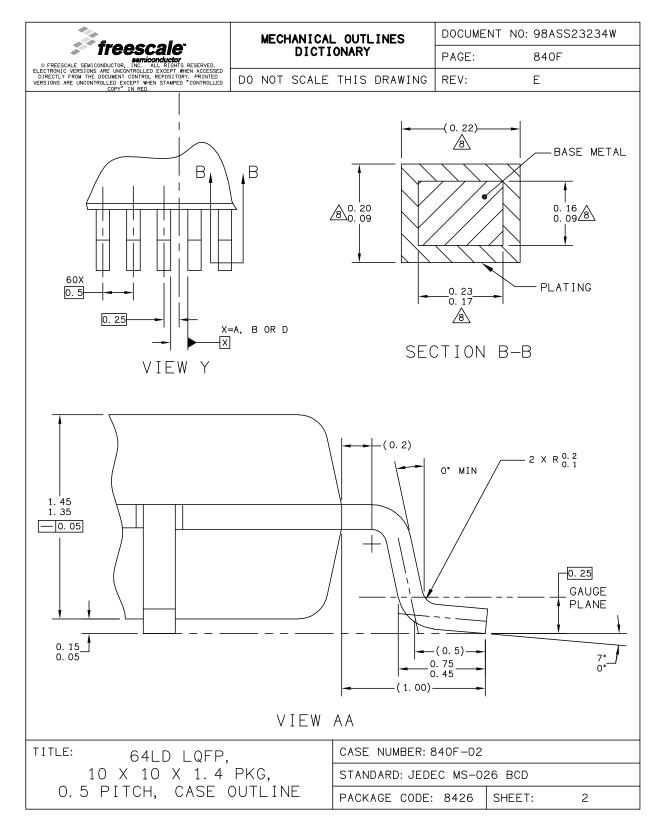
64 LQFP package mechanical drawing (2 of 3)
